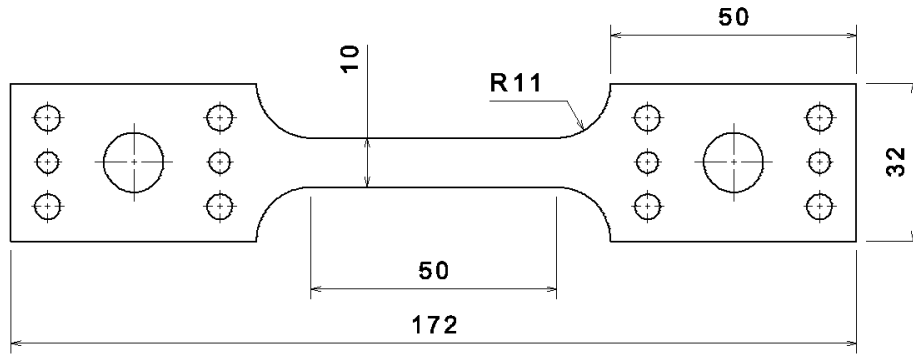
Geometry and dimensions of the uniaxial tensile test specimen.
